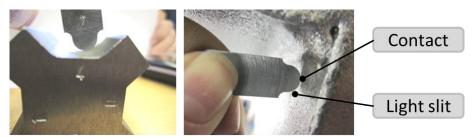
Ocular calibration of light slit appearance when gauge and block match (left) and gauge used on weld to assess whether the weld radius is larger or smaller than the gauge (right).
